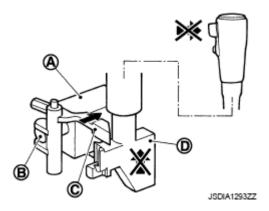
Identifying Shift Lock Operation "P" Courtesy of NISSAN MOTOR CO., U.S.A.
